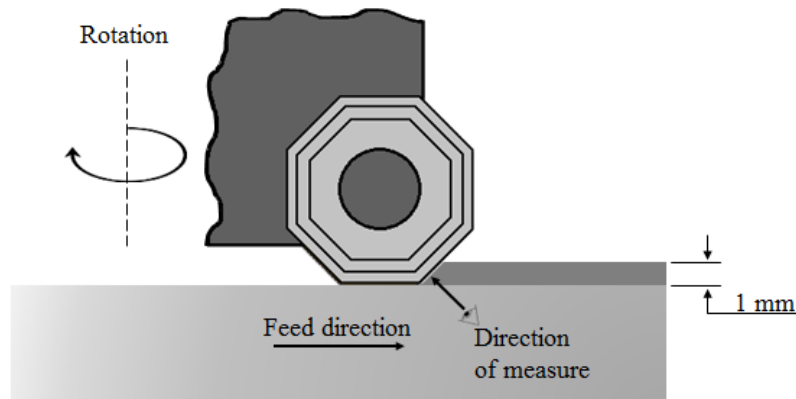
Schematic representation of the metal cutting operation and the direction from which tool wear is measured from the flank face
